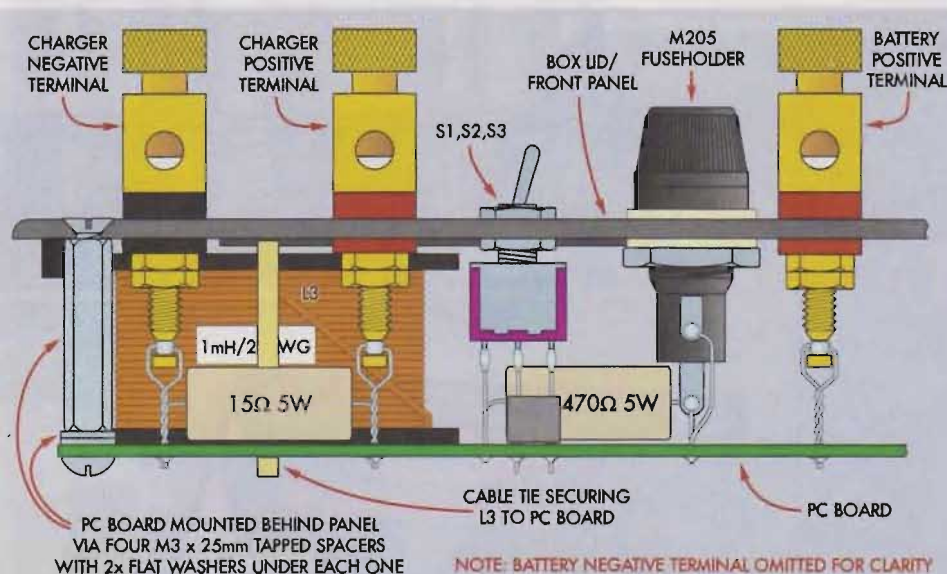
this end-elevation diagram shows how the PC board is mounted on the back of the lid on M3 x 25mm tapped spacers & washers. The front panel parts are connected to the PC board via "extension" wires.
